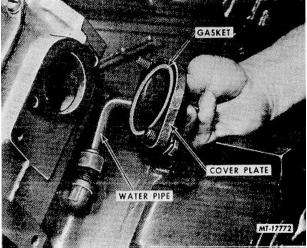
Removing Cylinder Block-to-Cylinder Head Water Pipe and Cover Plate
